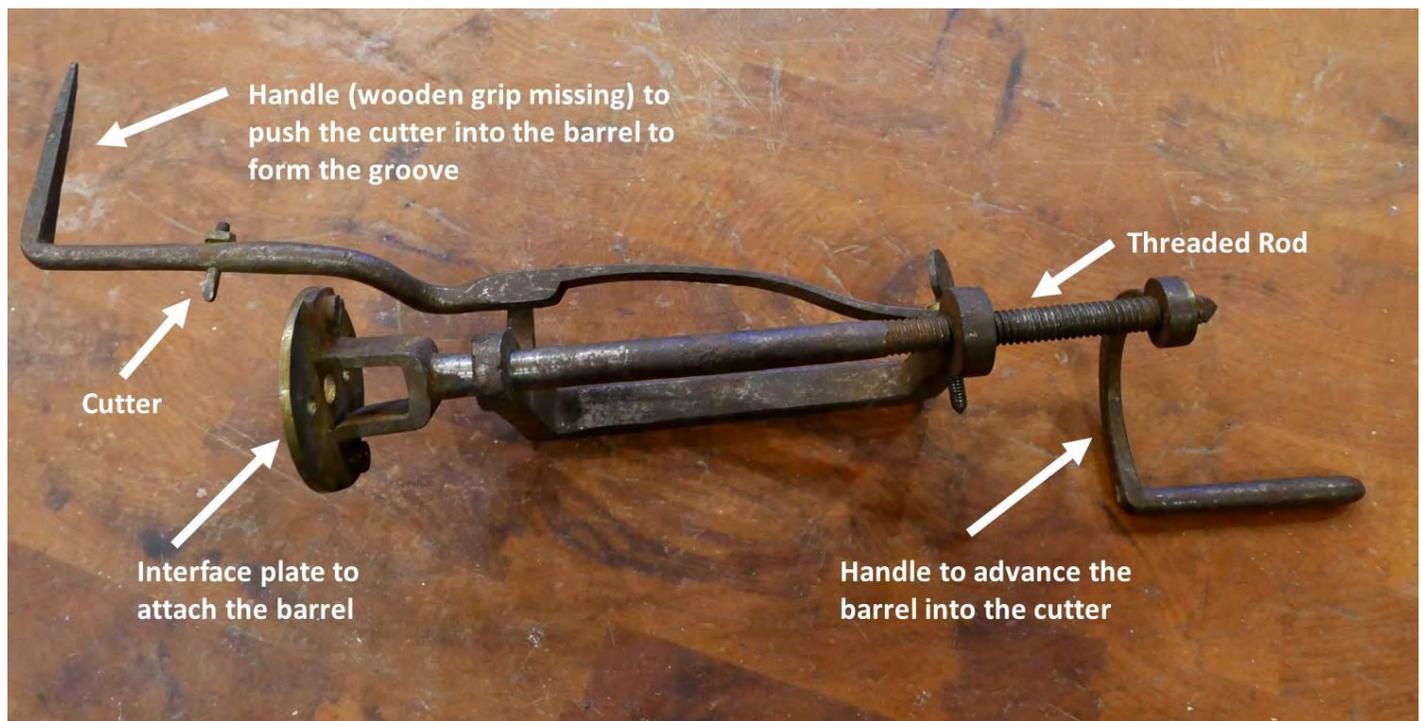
This simple single purpose barrel grooving engine was held in a bench vise and used to cut a spiral thread into the time and strike winding barrels.
